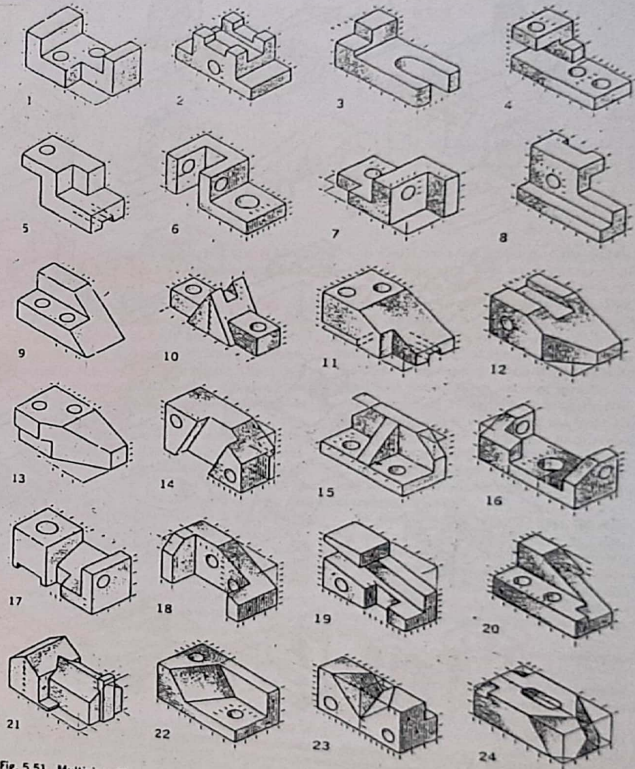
Multiview Sketching Problems. Sketch necessary views, using Layout A-1 or A4-1 adjusted (freehand), on cross-section paper or plain paper, two problems per sheet as in Fig. 5.50. The units shown may be either .50" and .25" or 10 mm and 5 mm. See §5.32. All holes are through holes.
